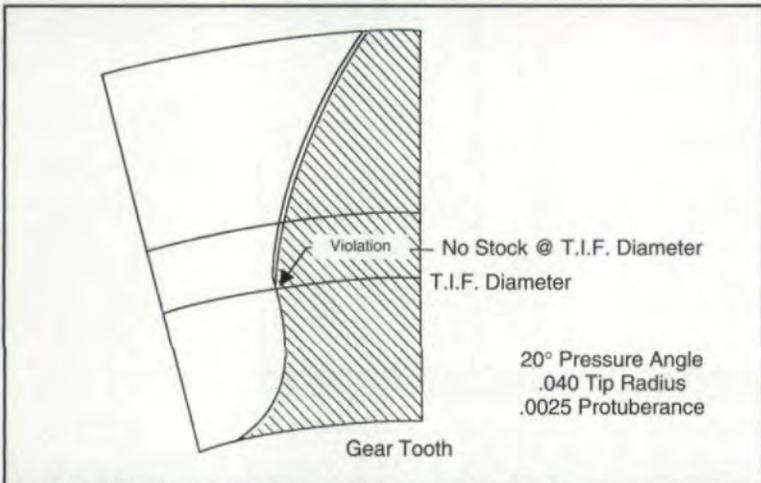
Gear tooth undercut which violates the T.I.F. diameter.
